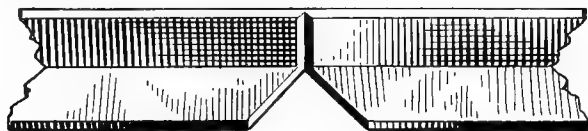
CUT, PREPARATORY TO BENDING ANGLE BRASS
